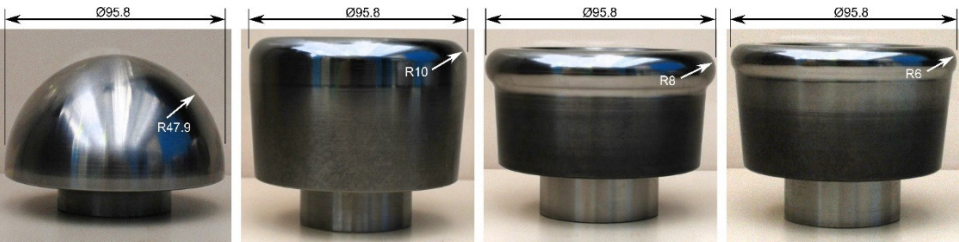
Set of punches with different edge radii for hole flanging tests by conventional press working (6 mm, 8 mm, 10 mm and 47.9 mm)
